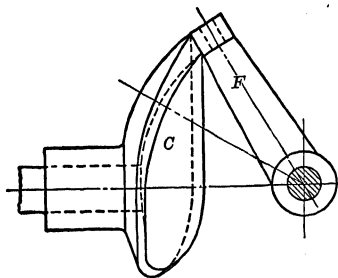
SPHERICAL CAM AND SWINGING FOLLOWER
